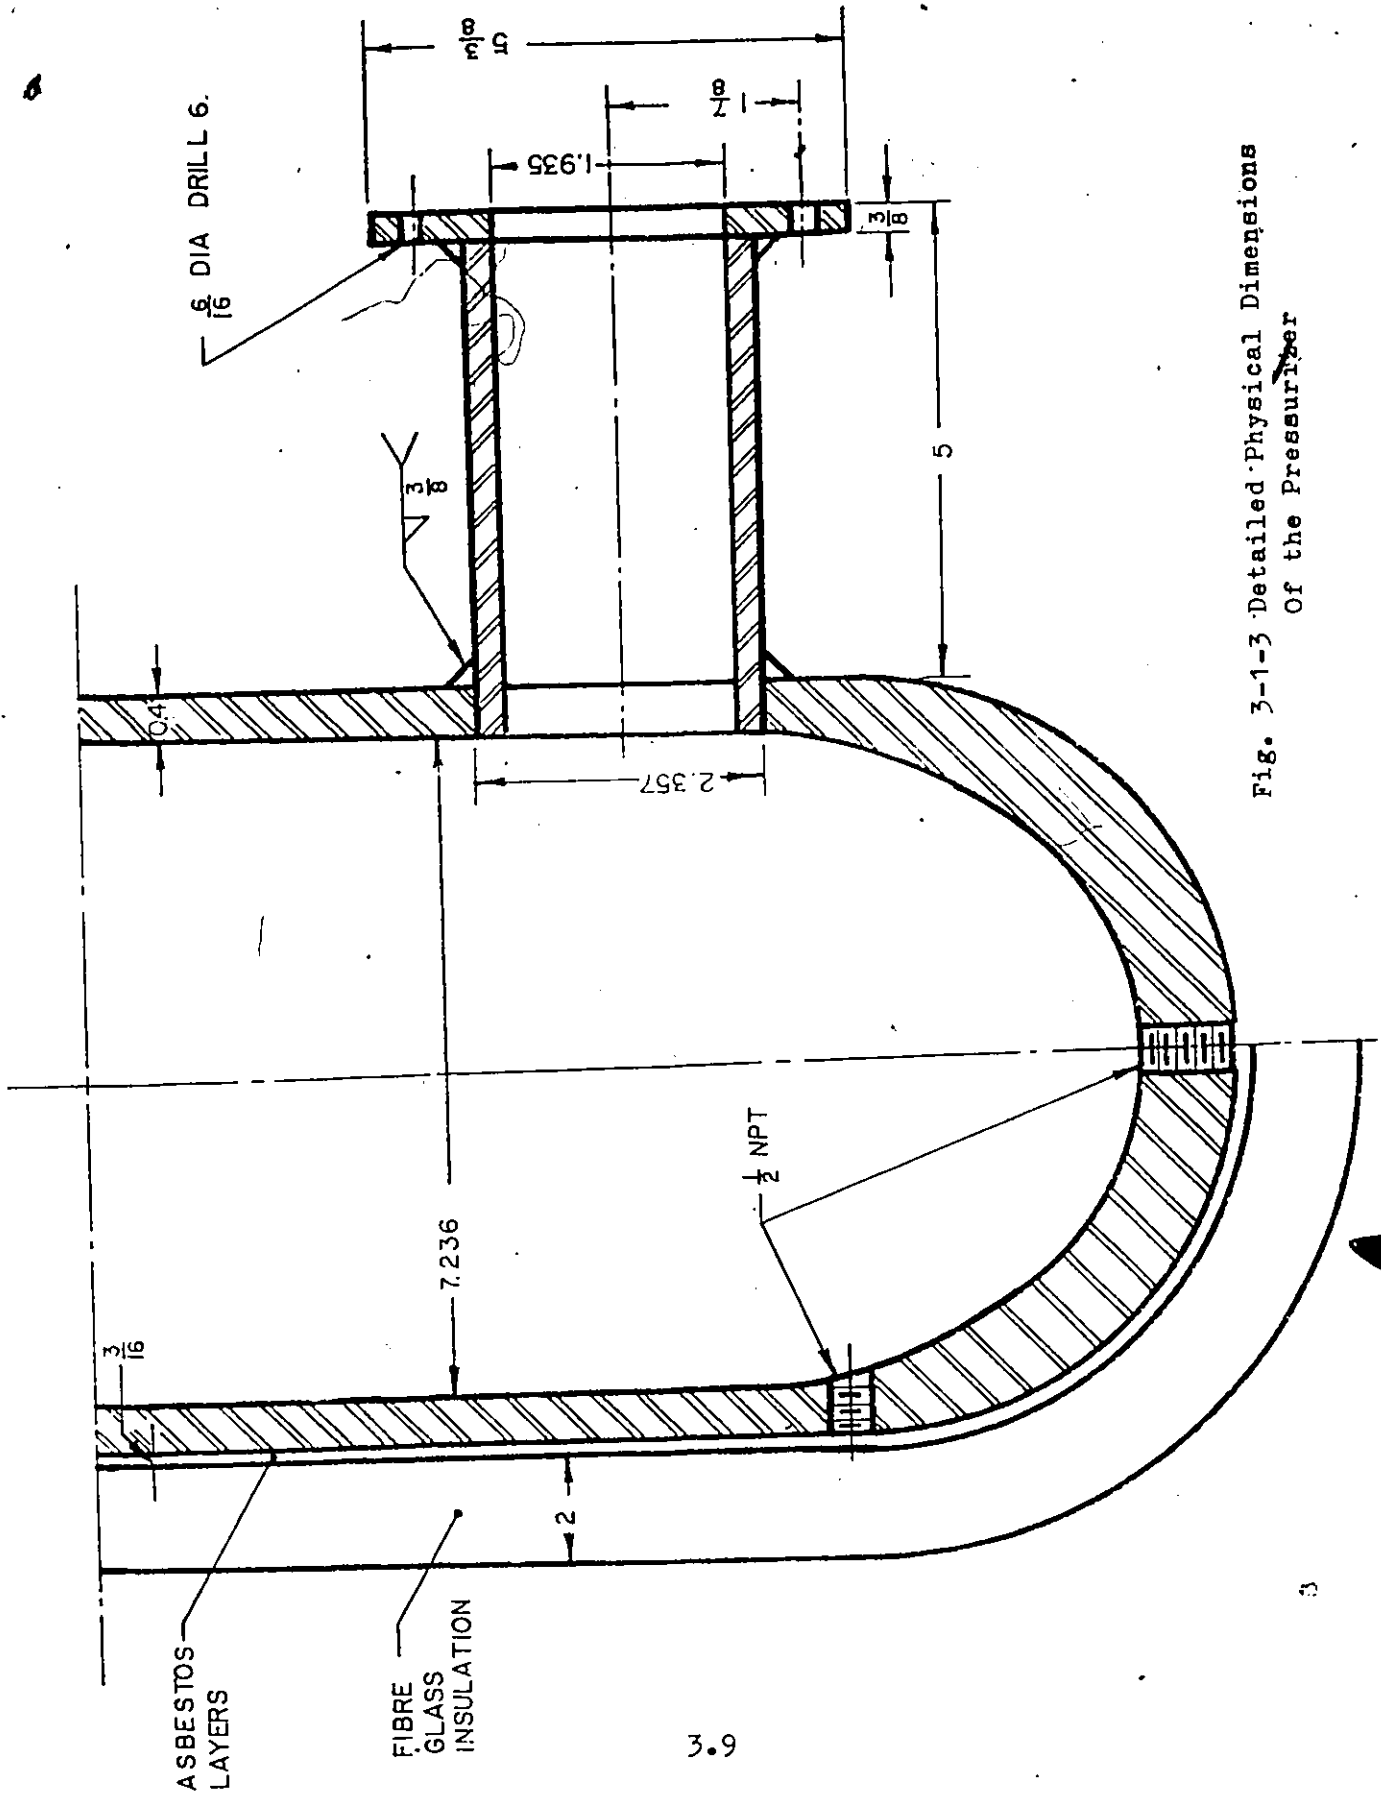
Detailed Physical Dimensions Of the Pressuriser
